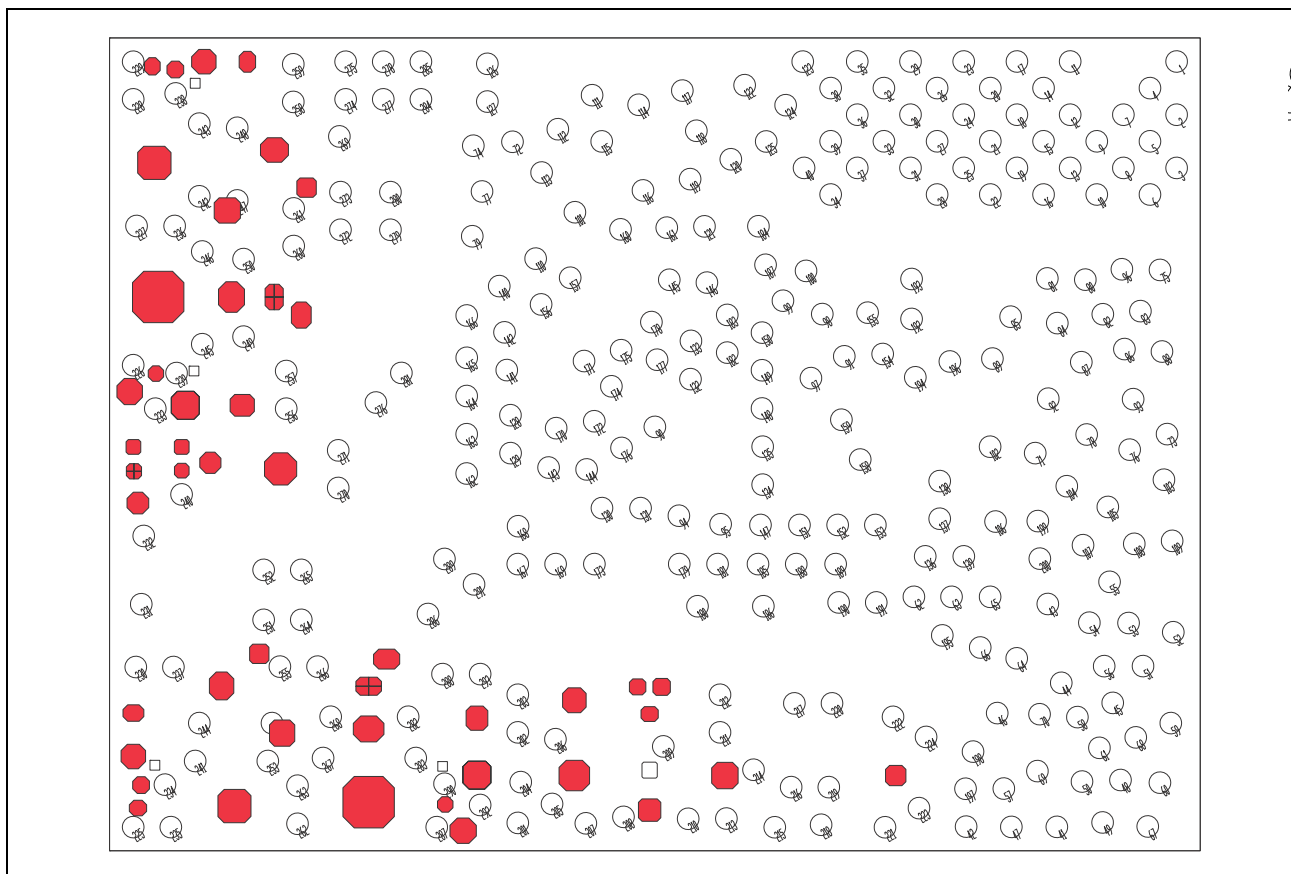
WLCSP Keep-Out Areas for PCB Layout — Bumps Facing Up
